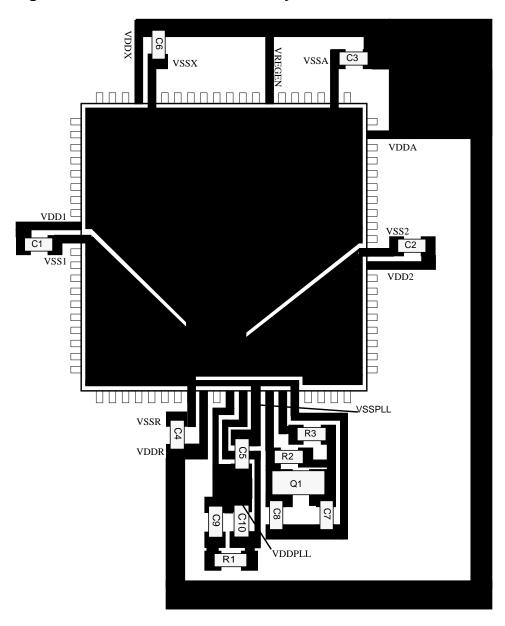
Recommended PCB Layout for 80QFP Pierce Oscillator
